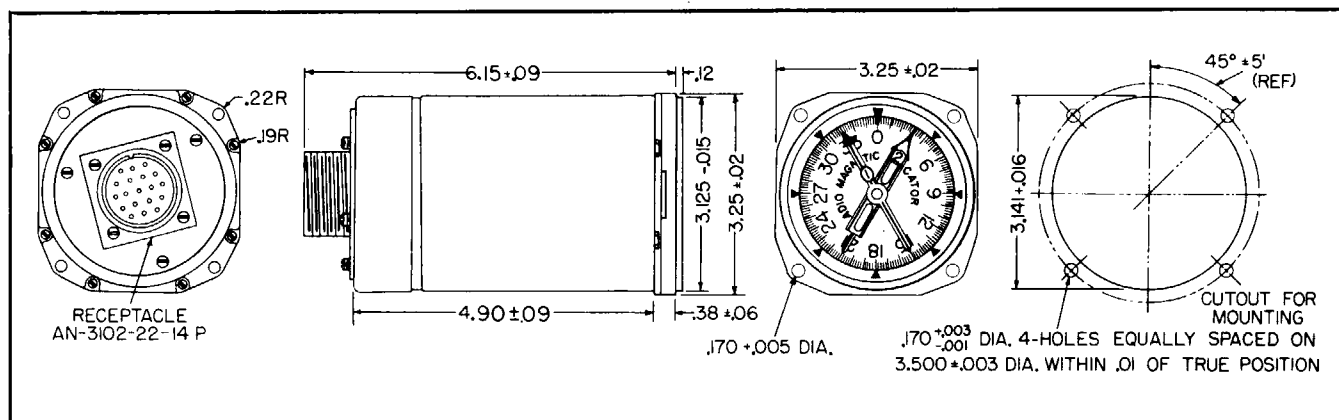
Course Indicator ID-250/ARN, Outline and Mounting Dimensions
